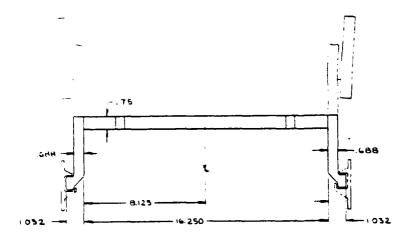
Dimensionalized Drawing of MPES Seat Structure (Guide Rail Interface)
